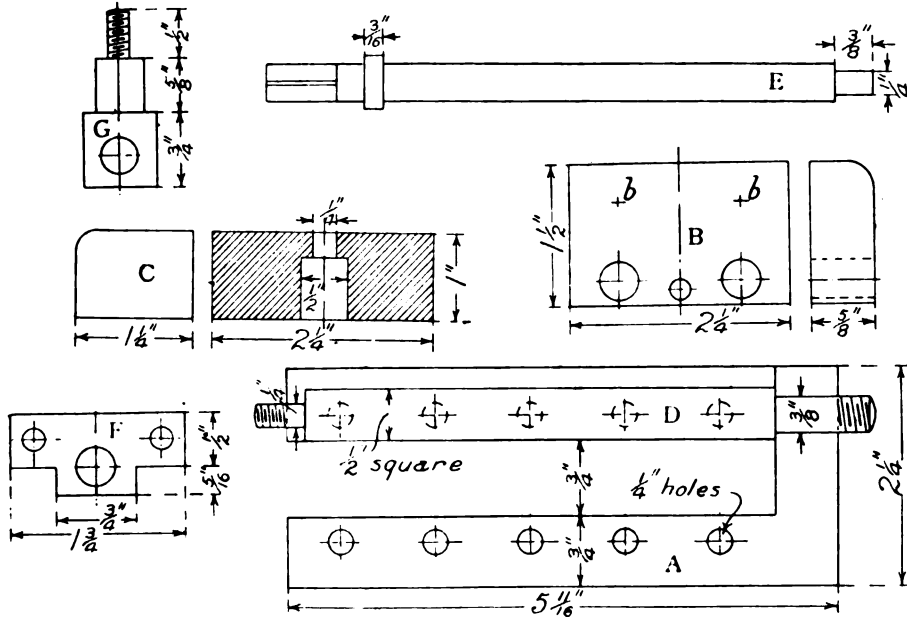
DETAILS OF SMALL DRILLING MACHINE VICE.
